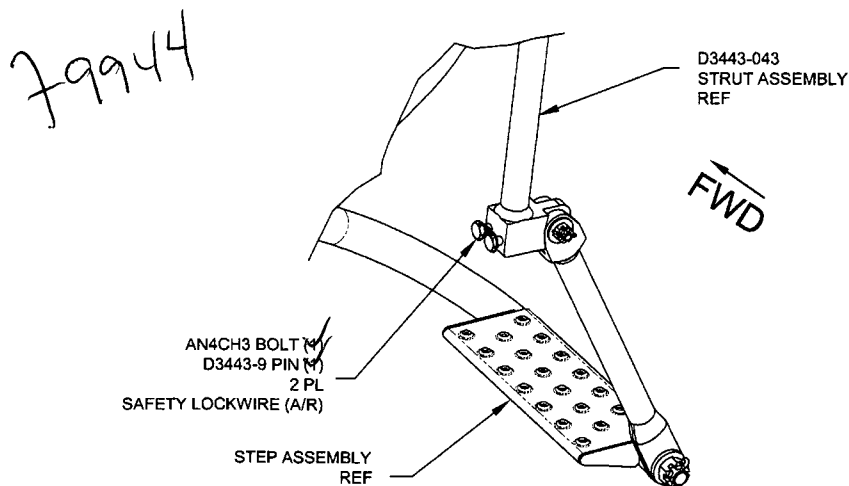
Detail Safety Wiring, D412-630-032 RH, Pilot/Co-Pilot Folding-Step Installation (Shown)
